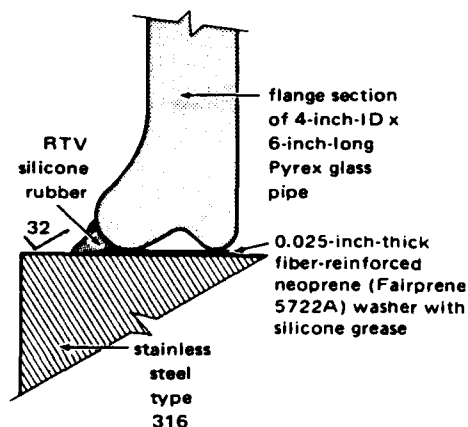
Experimental sealing and bearing system utilizing a fiber-reinforced neoprene washer between the glass pipe end flange and the metal end-closure plate.
